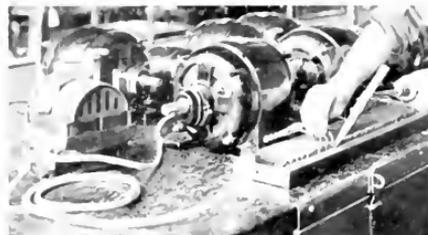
Use of the Pyrotip for Soldering Cables and Terminals
